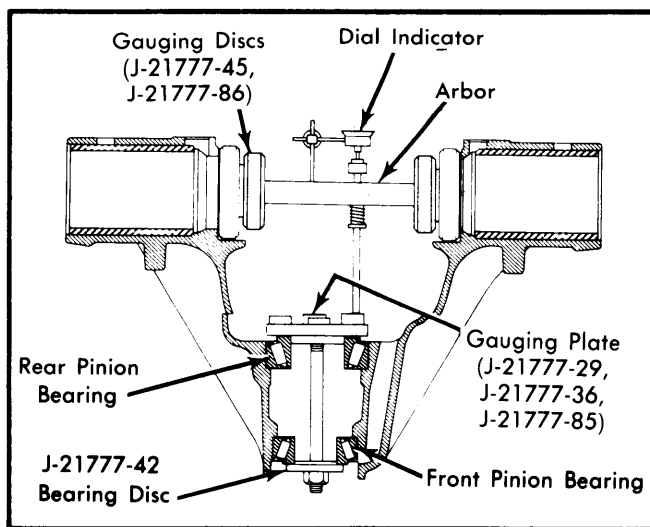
Sectional View Showing Use of Pinion Depth Tool Set (J-21777)
